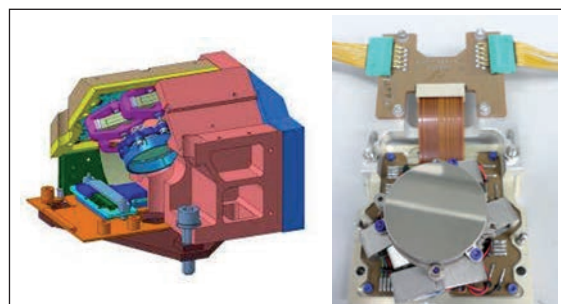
EQM of the BSM: a- CAD view of BSM b- TTM stand alone
